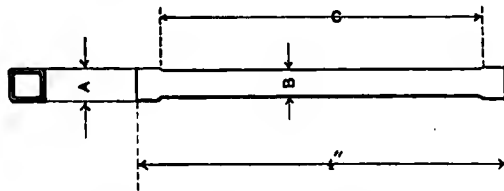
Dimensions of a Fedders radiator tube as used in the honeycomb type of radiator
